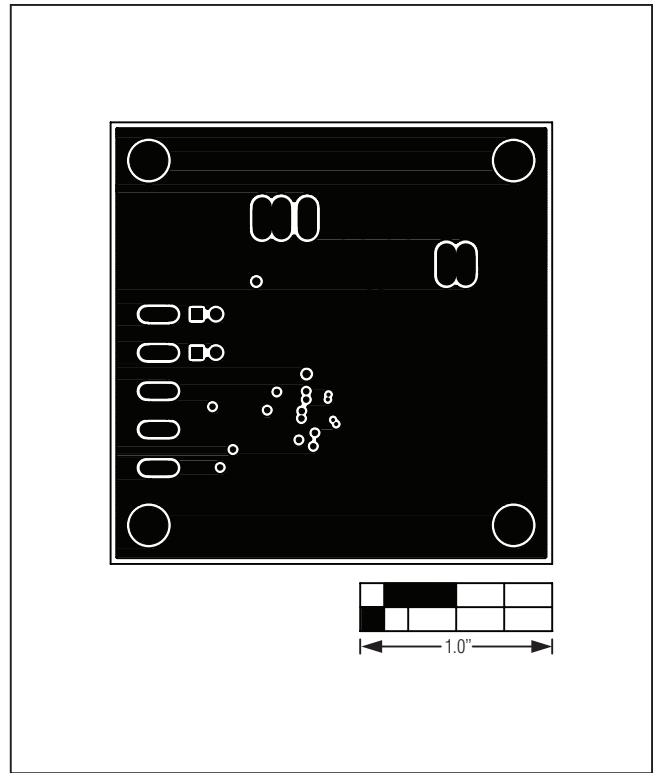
MAX15108 EV Kit PCB Layout—Inner Layer 2
